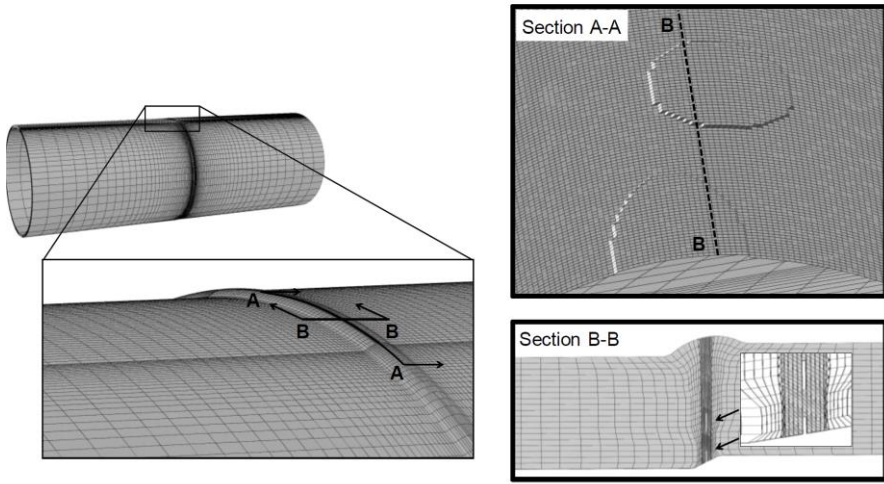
Example model of a misaligned weld with irregular fusion line geometry and cap reinforcement, containing two flaw.
